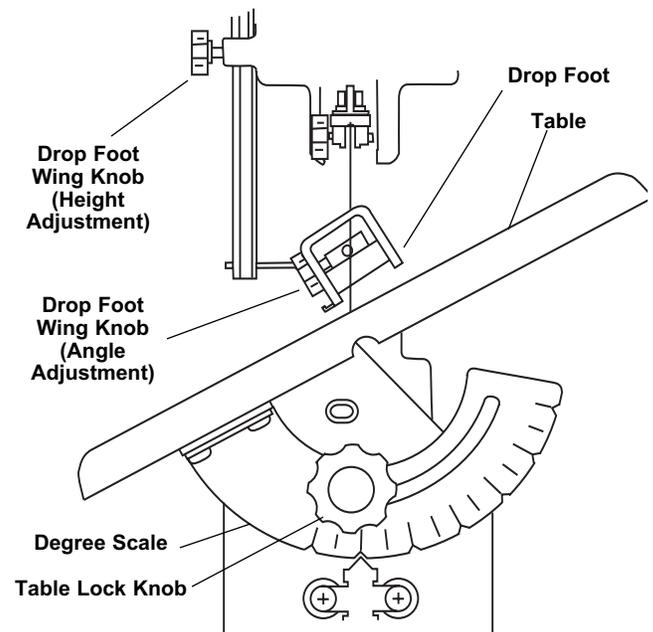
Adjusting Table for Horizontal or Bevel Cutting
